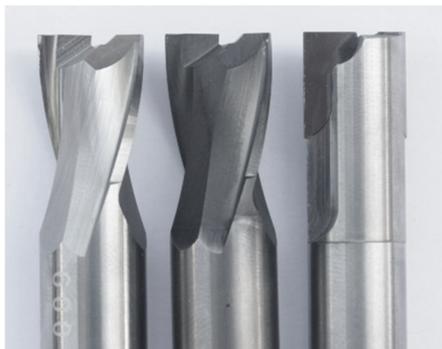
Milling tools used for the experiments (left – uncoated UC; middle – CVD diamond coated DIA; right – PCD tool).
